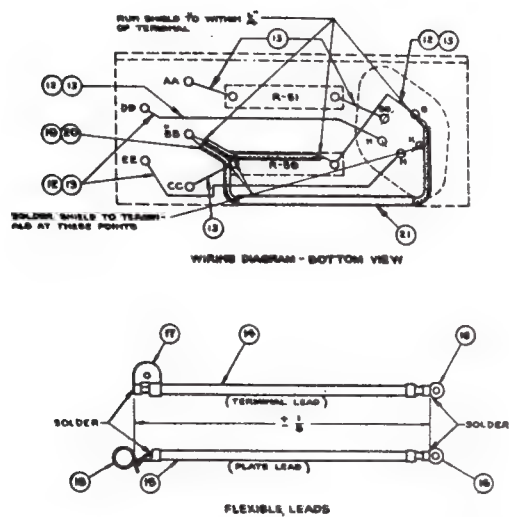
Vacuum tube keyer unit wiring diagram (bottom view) and flexible lead details
